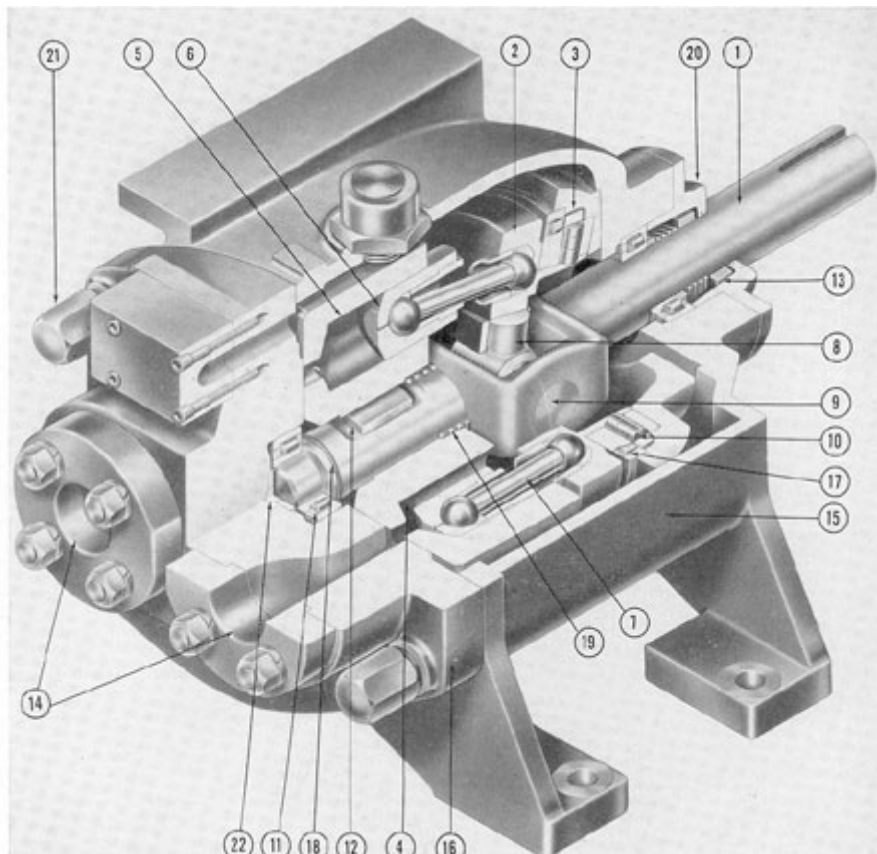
Cutaway of Waterbury B-end. 1) Main shaft; 2) socket ring; 3) angle-box; 4) cylinder barrel; 5) cylinder; 6) piston; 7) connecting rod; 8) universal joint; 9) pin; 10) axial thrust bearing; 11) roller bearing; 12) chaff keys; 13) oil seal; 14) ports; 15) case; 16) valve plate; 17) radial thrust bearing; 18) spring lock; 19) barrel spring; 20) end-plate; 21) case bolt; 22) intershaft disk.
